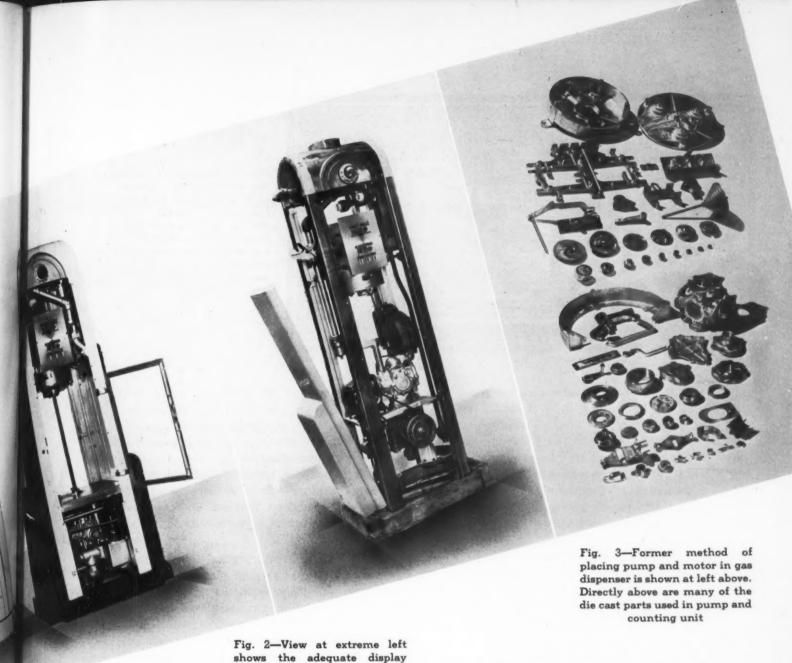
View at extreme left shows the adequate display space that is now possible with redesigned pump. Adjacent view depicts method of mounting pumping unit in base
